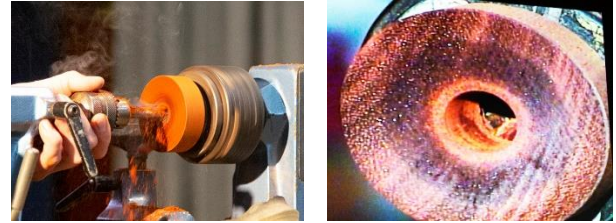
and 26 – Drilling the hole and a view after drilling complete
